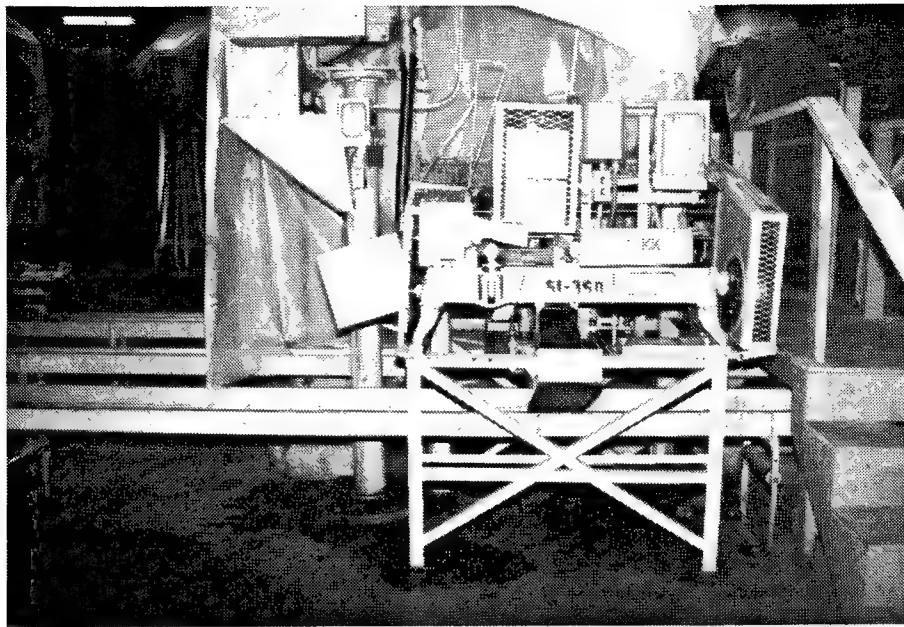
Building 3A: Case Trim Machine manufactured by Jennings Machine Co.
